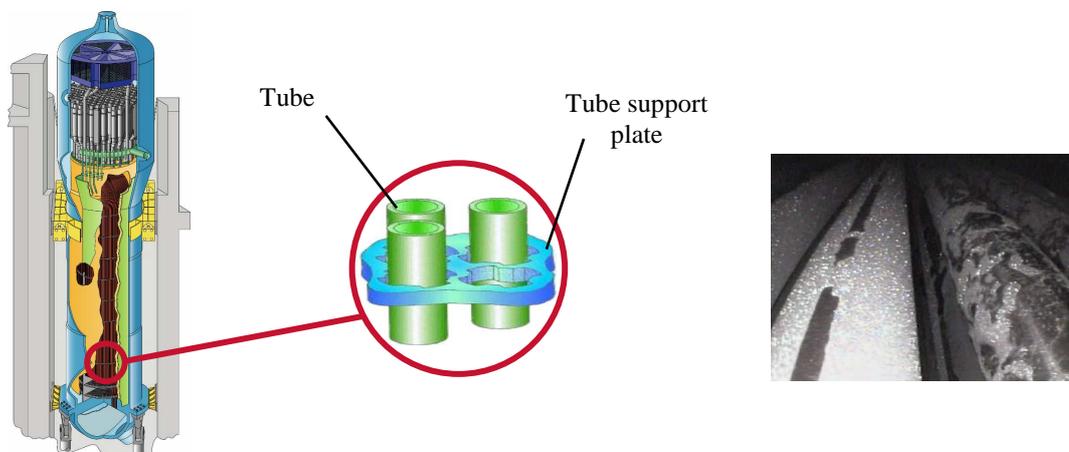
Left: steam generator cut away. Right: steam generator tube secondary side deposit
